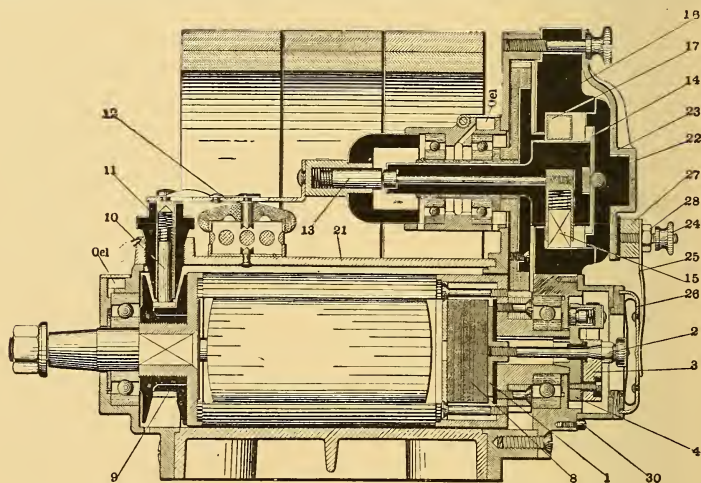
Arrangement of Bosch H.T. Magneto.
